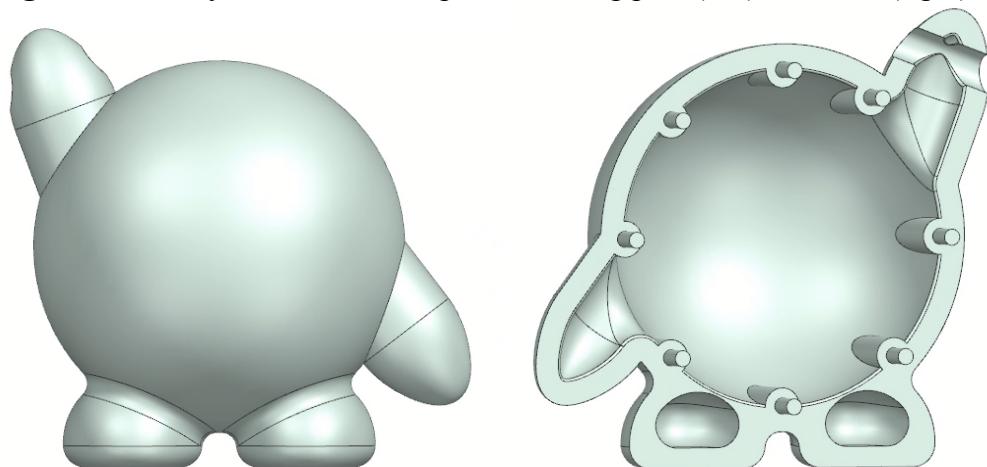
Kirby Back side with inserts (left) and back (right)
